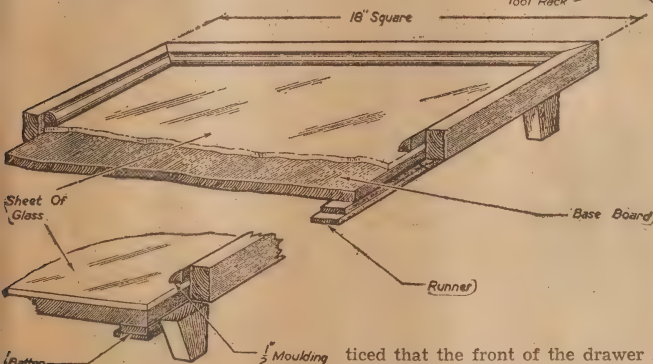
Assembly of top side of bench and detail of moulding and under-batten.
